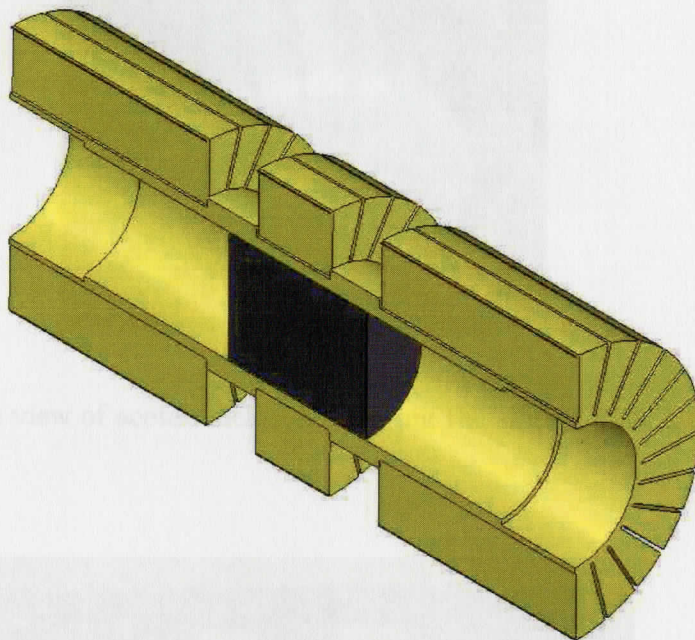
Sectional drawing of the machined acetal material for the compressor at 1:1 scale
